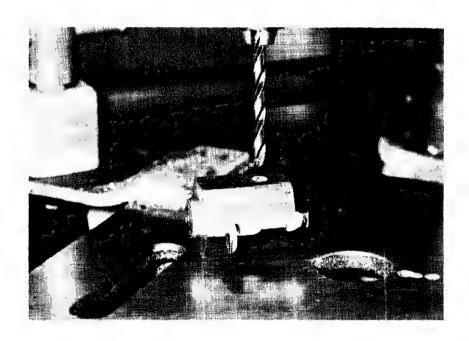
Using Jig to Drill Ball Release Hole in Sleeve Section
